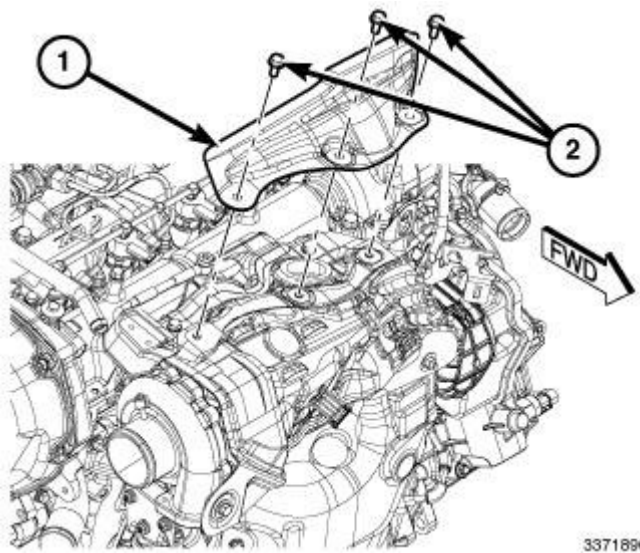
Upper Turbocharger Heat Shield & Mid Upper Turbocharger Heat Shield
